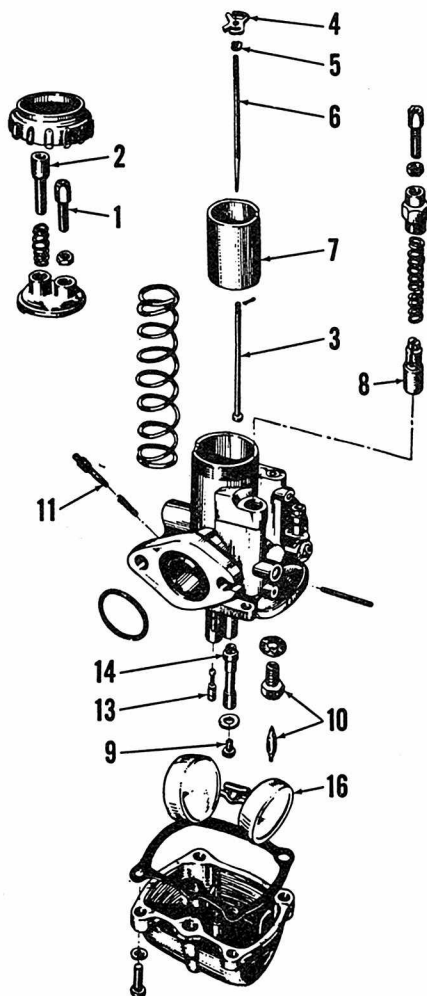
Exploded view of Mikuni VM carburetor used.
